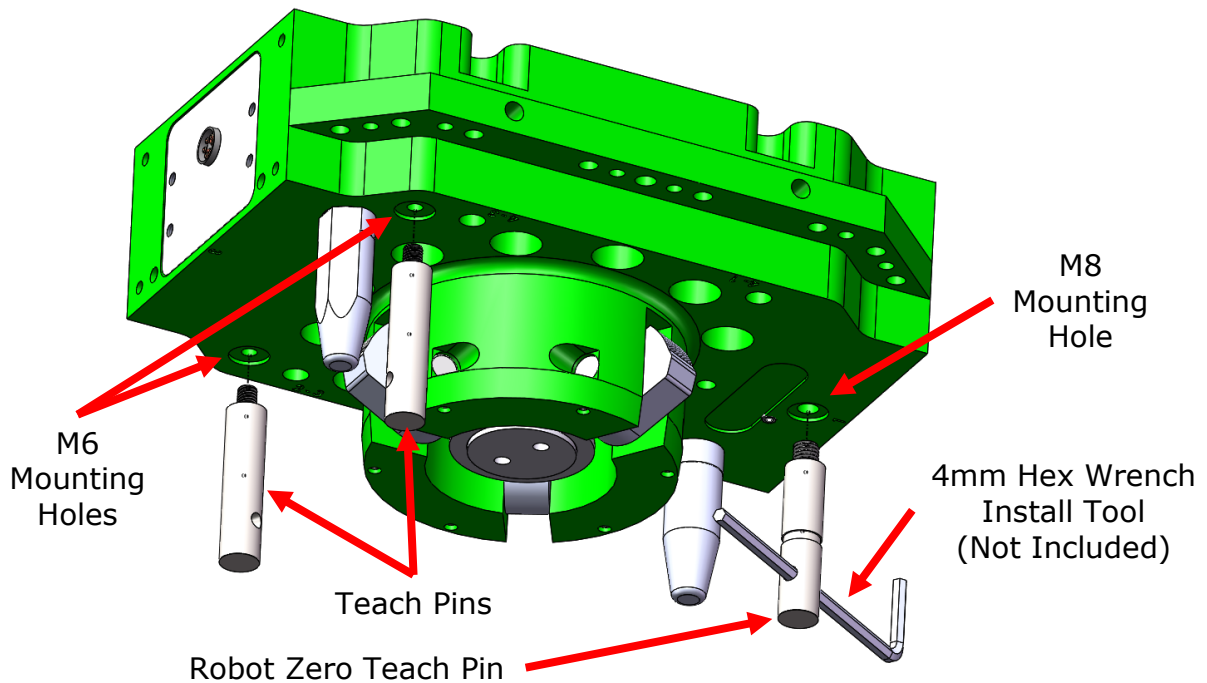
Teach Pin Mounting – E125 Robot Side
